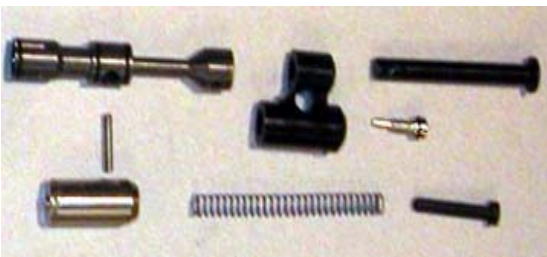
Disassembled Cocking Device: Rod, Bolt, and Hammer
